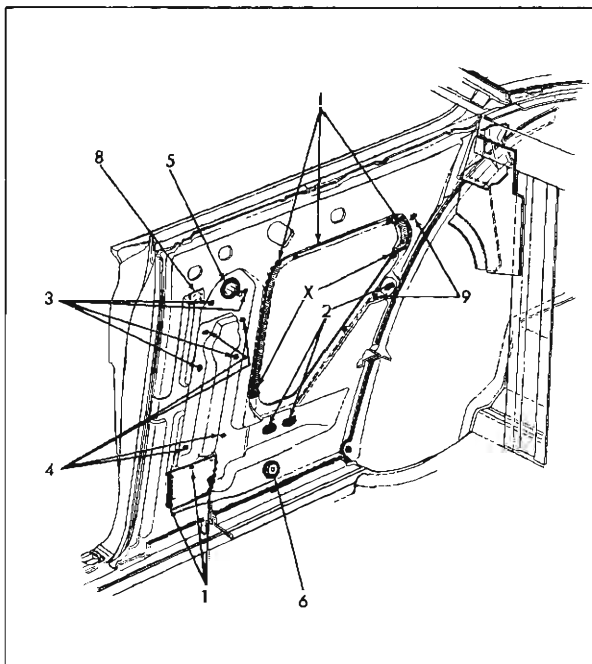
Inner Panel Sealing—"47" and "57" Styles
